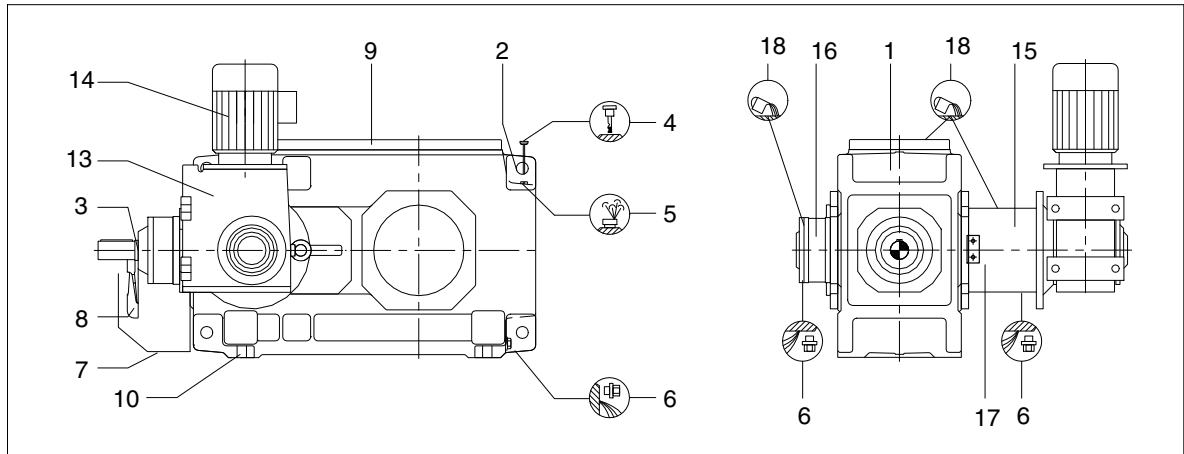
Gear-unit features on gear units of type B3.H \geq 514
